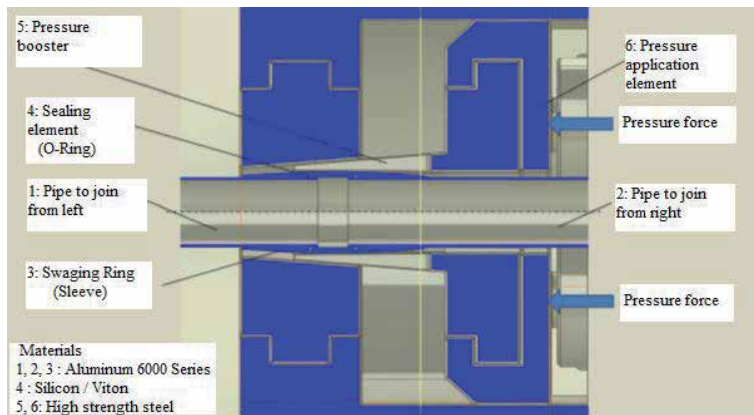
B type swaging circle; radial swaging designs with pressure against axial tension and pressure booster [13].
